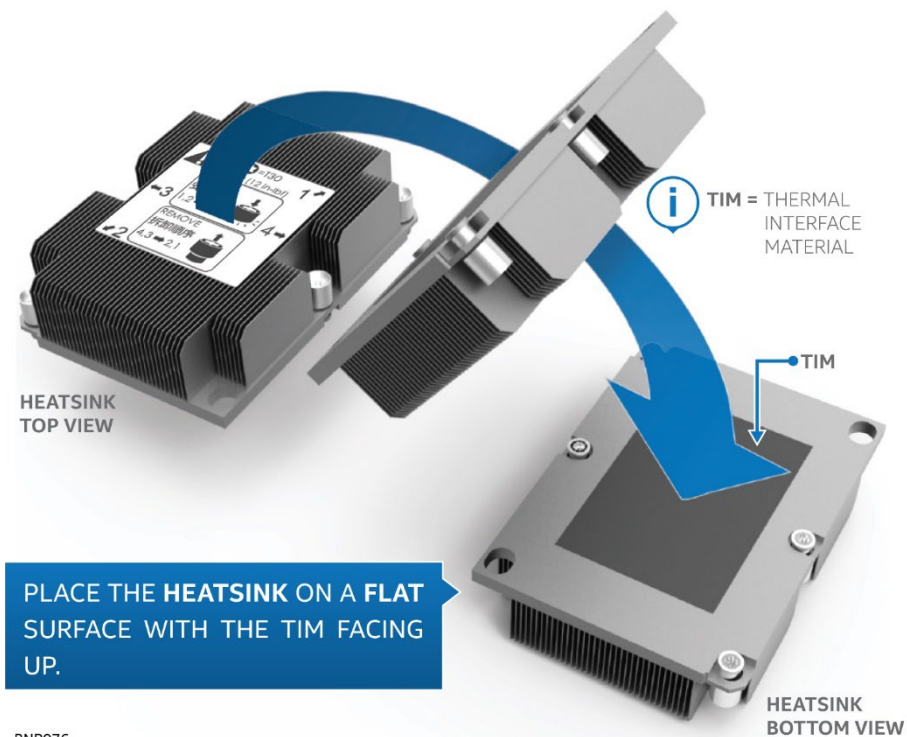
Place the Processor Heat Sink on to a Flat Surface
